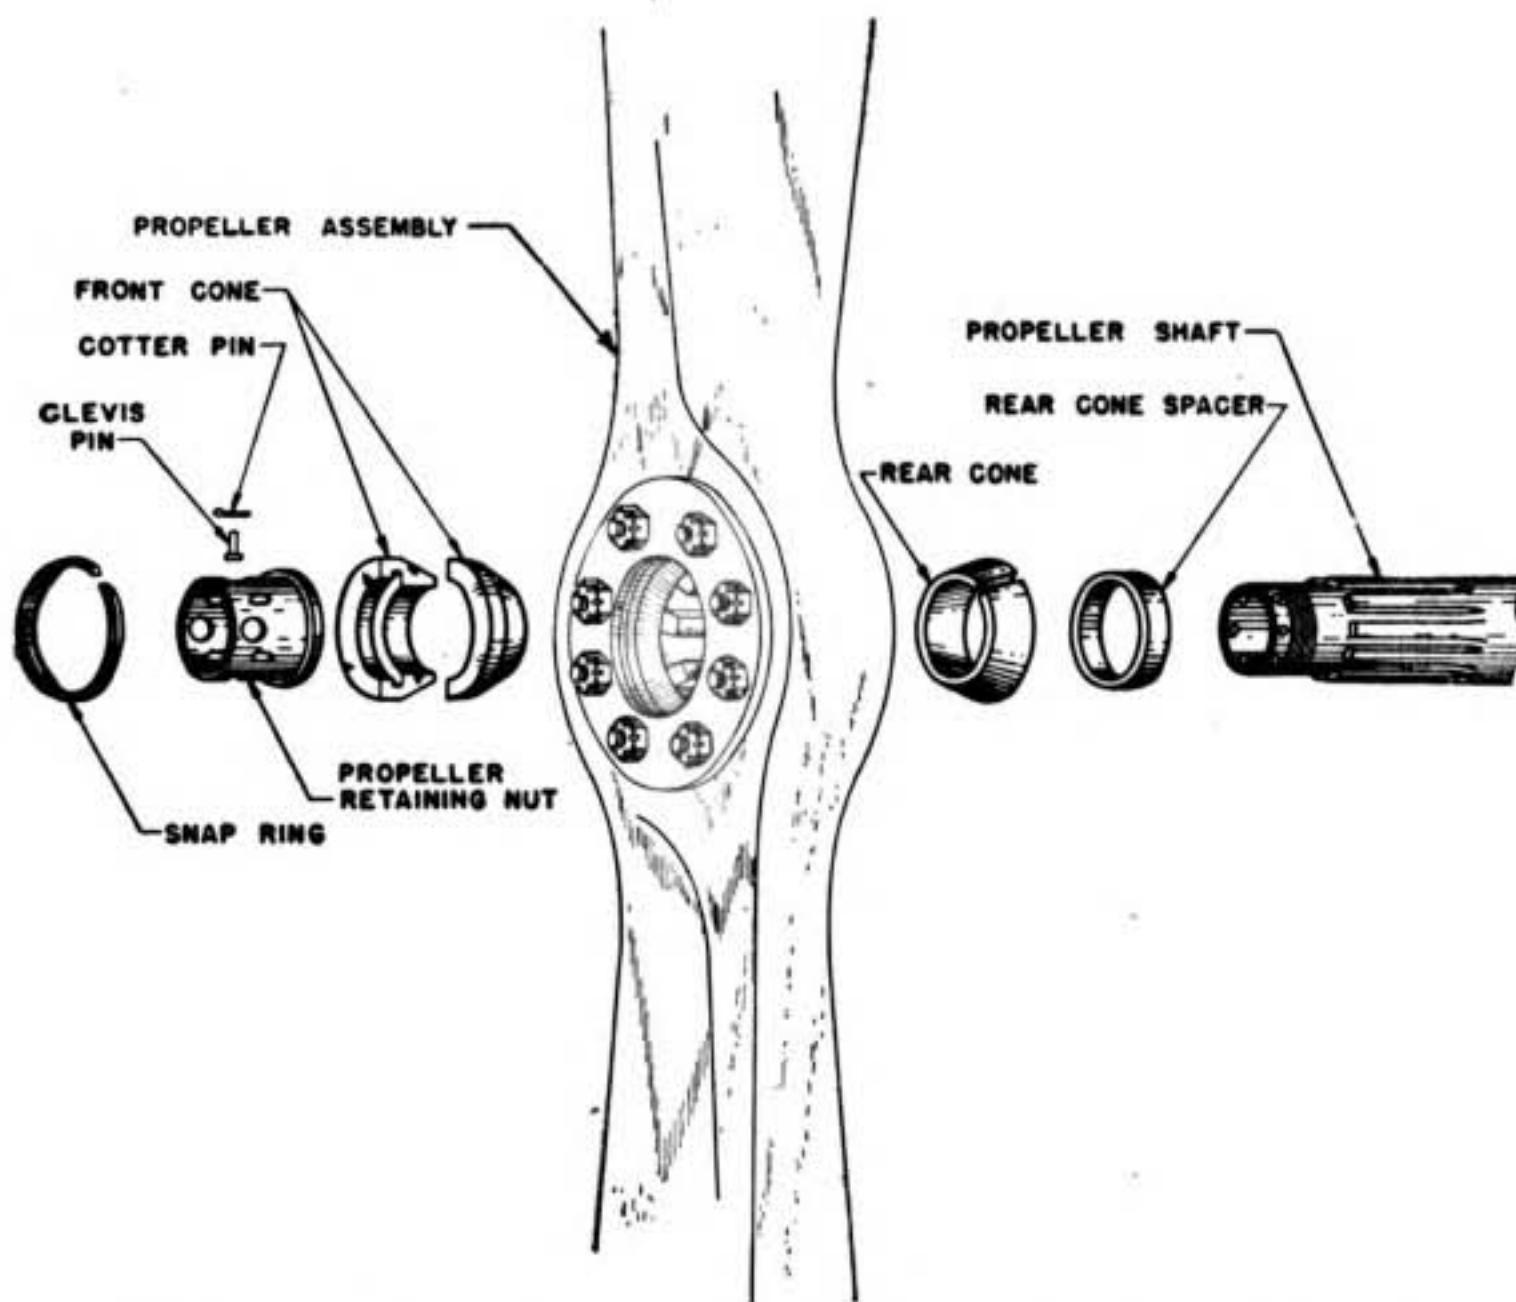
Removal and installation of wood propeller with splined shaft.
